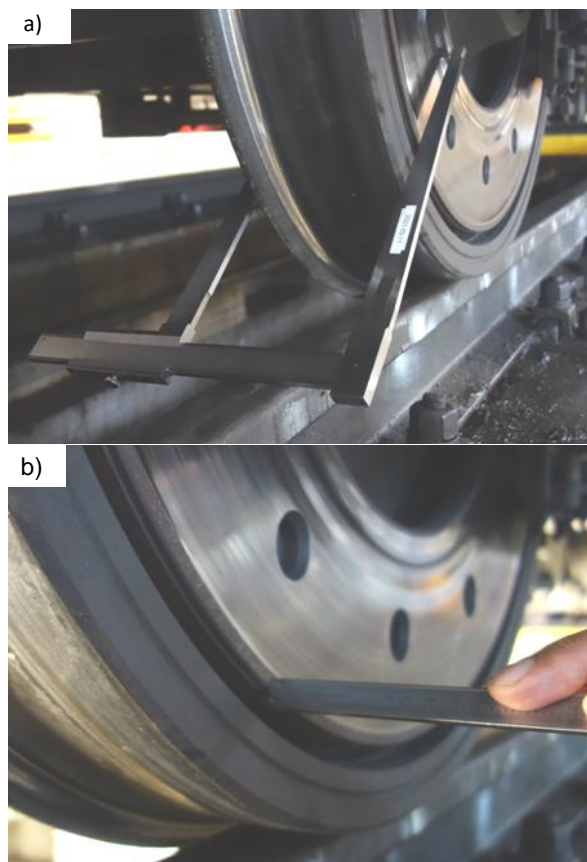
Geometric measurement of brake discs. a) brake disc width (dimension T), b) brake disc control groove depth (dimension R) [W. Sawczuk]
